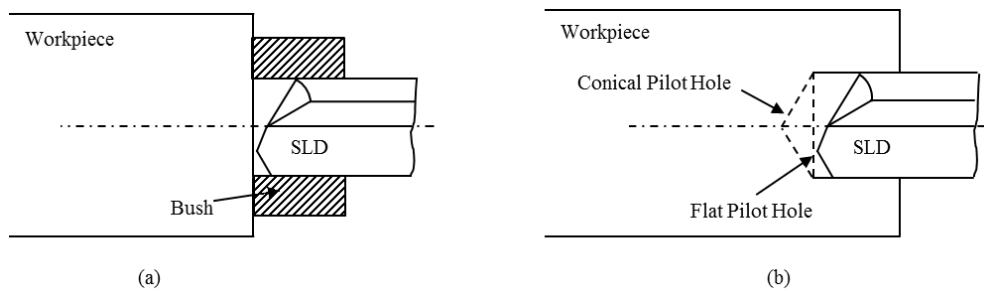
(a) Deep hole drilling set-up with pilot bush (b) Deep hole drilling with flat or conical pilot hole profile
